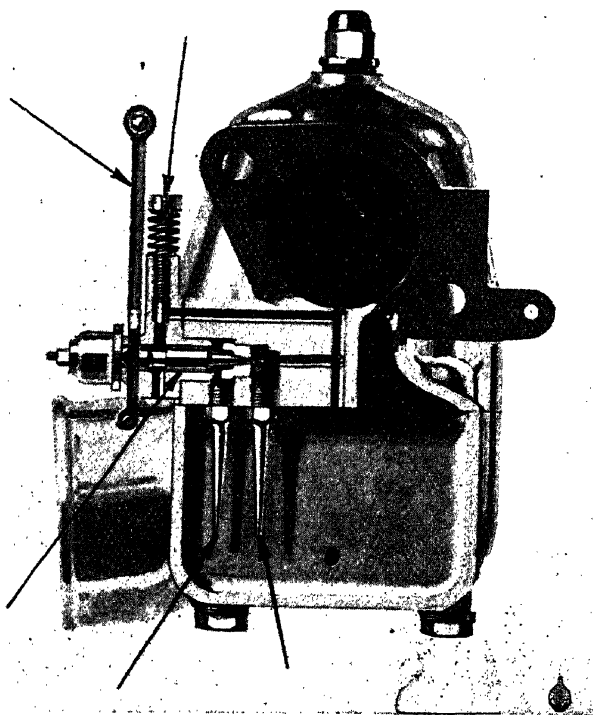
The Daimler Carburettor, showing the Petrol Primer and Slow Running Jets.
